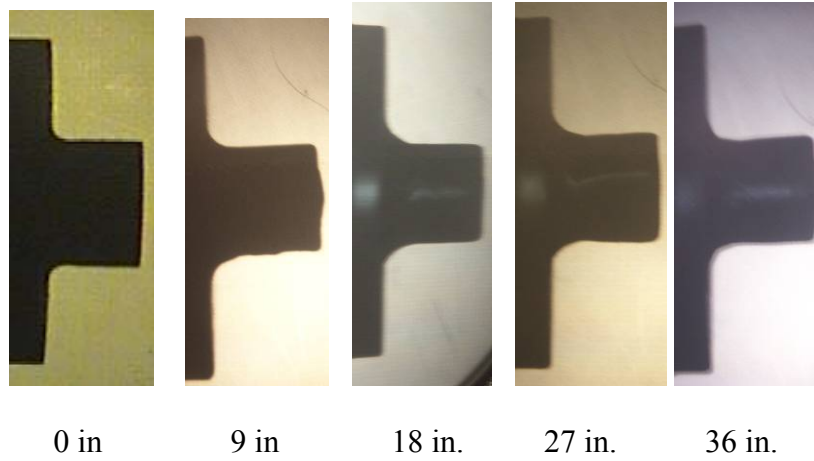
Wear of Trivex tool for butt welding of Al 6061/SiC/17.5p at 1000 rpm and 4 ipm.
